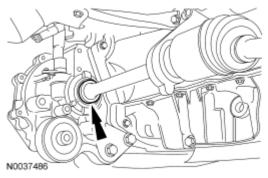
Locating RH Halfshaft Into Transaxle Courtesy of FORD MOTOR CO.
